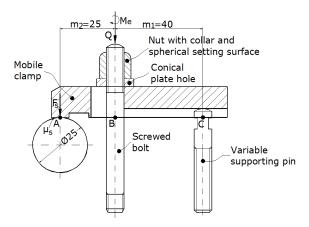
Fixing scheme with mobile clamp of the shaft.
